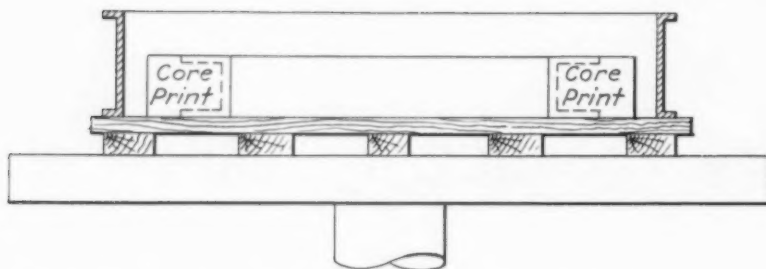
Triangular base fitted for jolt machine. This method reduced the cost of production a further 200 per cent.
